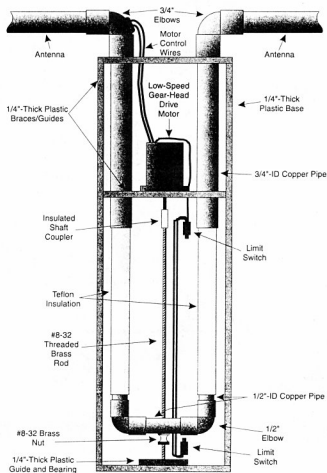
Mechanical drawing of KD7S Loop Tuning Capacitor.
